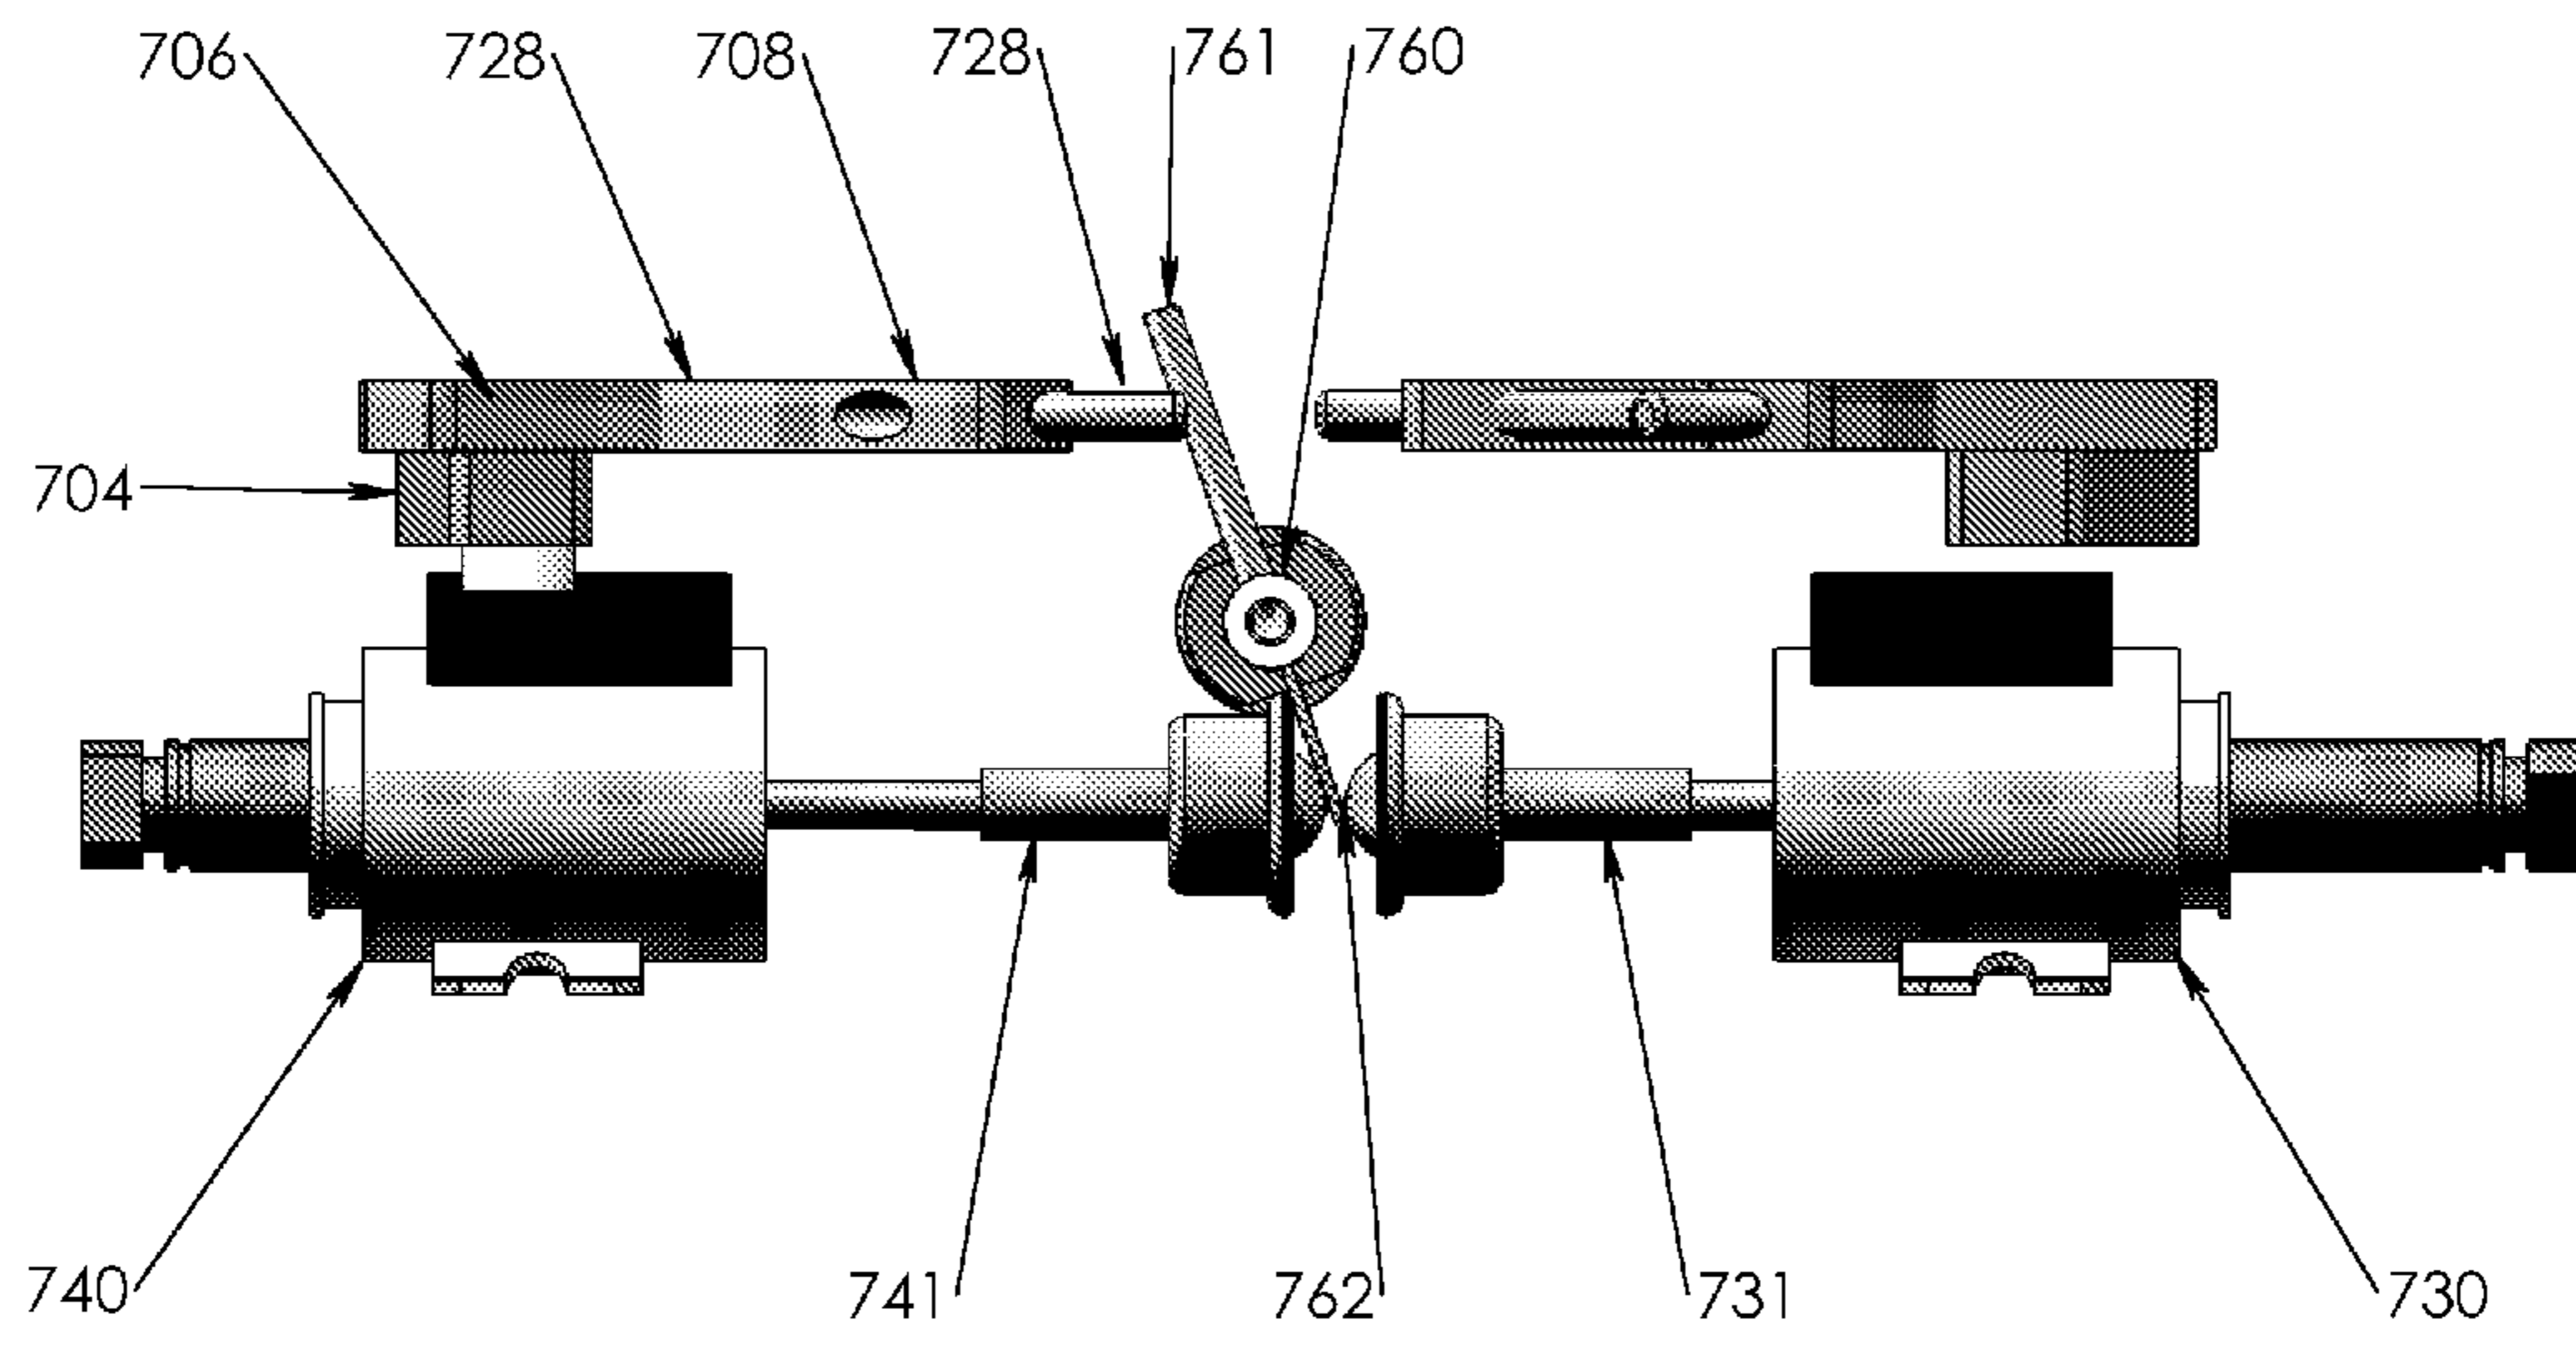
A. SIDE, CROSS-SECTIONAL VIEW OF COMBUSTION ASSEMBLY DETAILING FIRST AIR PUMP SECTION
